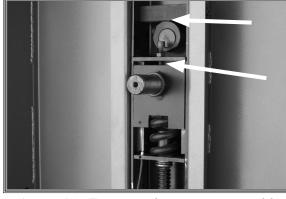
Tension adjustment assembly locations (top wheel removed for clarity).
